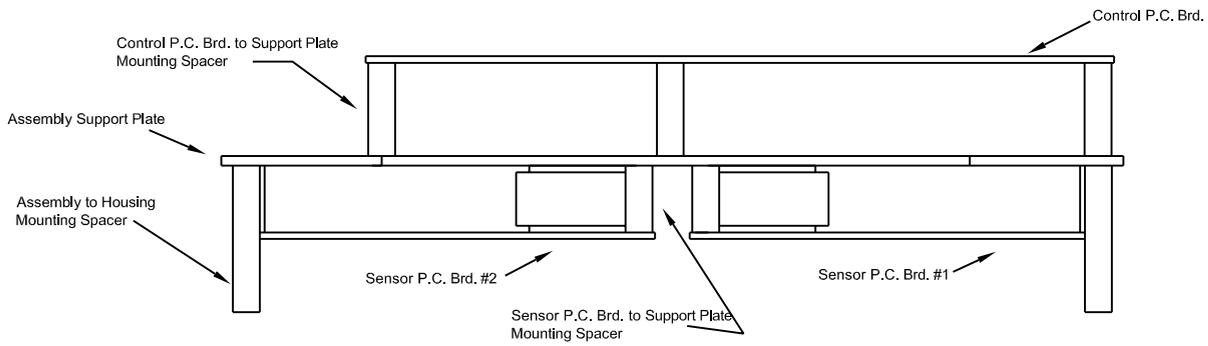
Assembly View, GSE detector P.C. Board/support plate.
